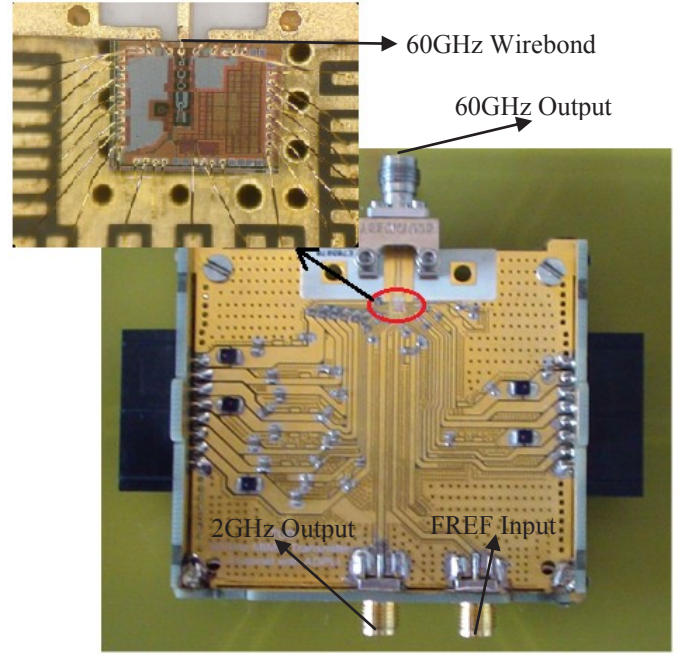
The fabricated ADPLL board with the IC directly wirebonded.
